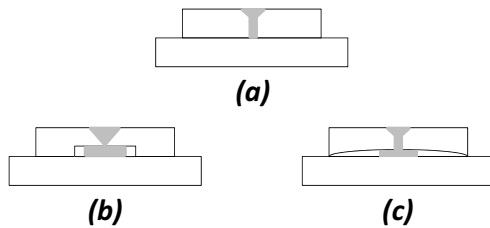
Acceptable butt weld in Type B sleeves. (a) Without backing plate; (b) With backing plate and slot; (c) With backing plate without slot.
